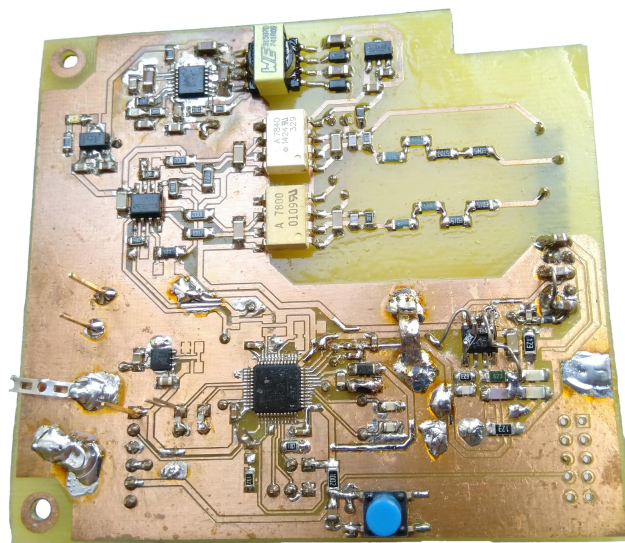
Photo of the prototype of the control unit made on single-sided PCB
